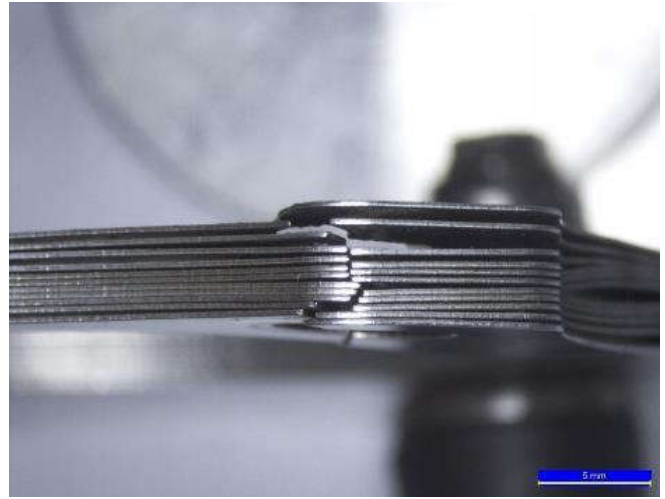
membrane hole with fretting damage around the hole and crack propagating from the bolt hole and failure across of the membranes
